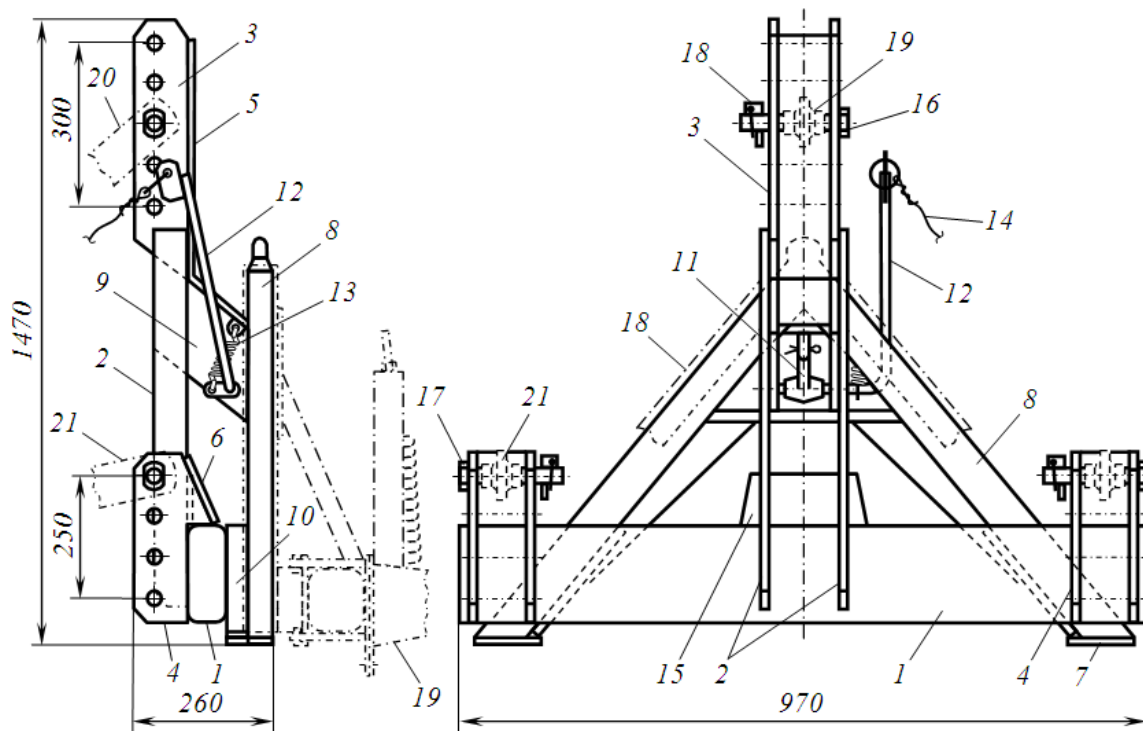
PN device for tractor ancillary equipment for its aggregation with disc tools with a coupler: 1 - beam; 2 - stand; 3 and 4 - upper and lower eyelets; 5 - wall; 6 and 7 - straps; 8 - frame; 9 - cheek-piece; 10 - strut; 11 - catch; 12 - handle; 13 - spring; 14 - cable thread; 15 - kneepiece; 16 and 17 - fingers; 18 - lock; 19 - cultivator; 20 and 21 - upper and lower links of tractor ancillary equipment.
